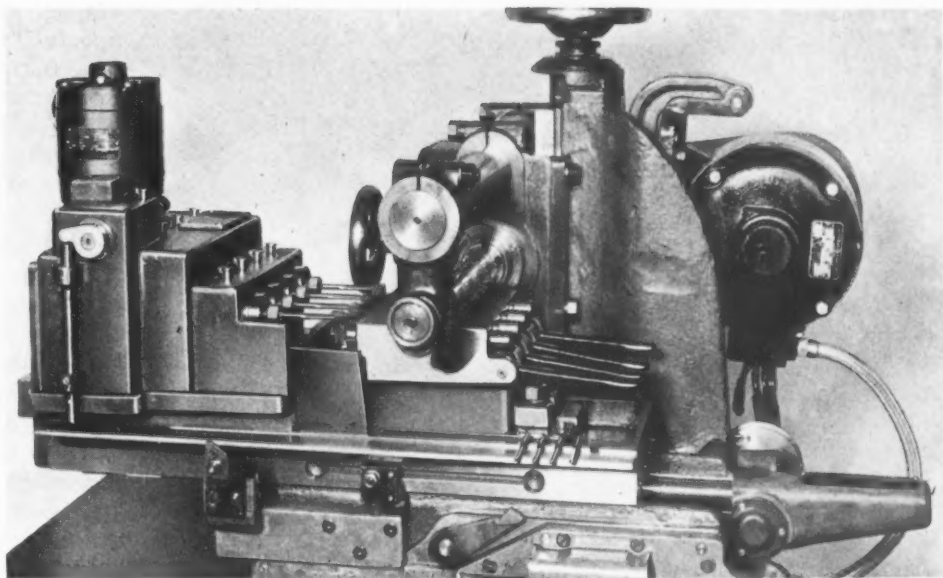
Milling Relief Grooves in Brass Pump Impellers
